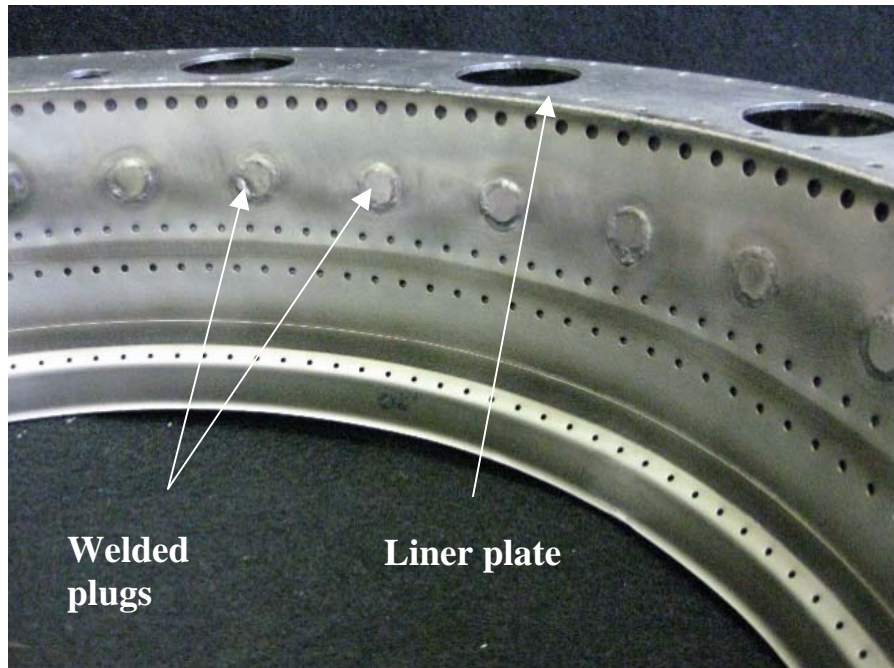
Picture showing the welded plugs and weld holding the liner plate. Photo by author, 2009.
